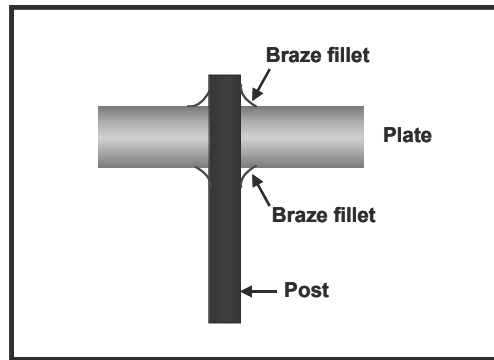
Cross-section of hardware assembly showing 2 braze fillets per joint.
